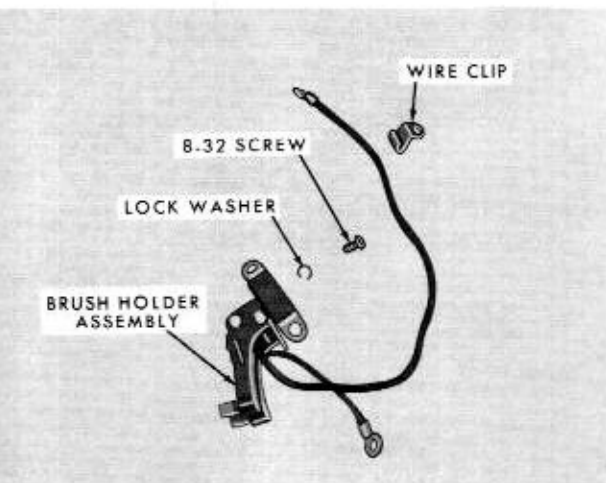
B-5—Brush Holder Assembly—(61LT-8812)
